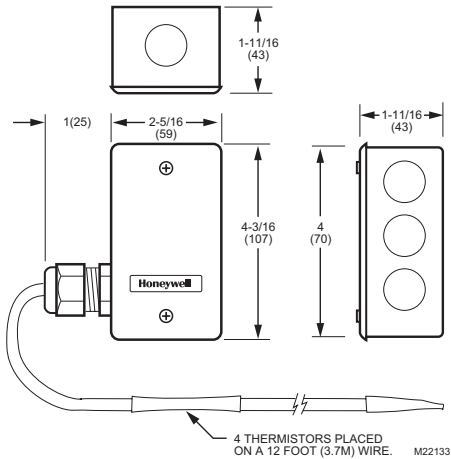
C7031J, C7041J dimensions in in. (mm).
